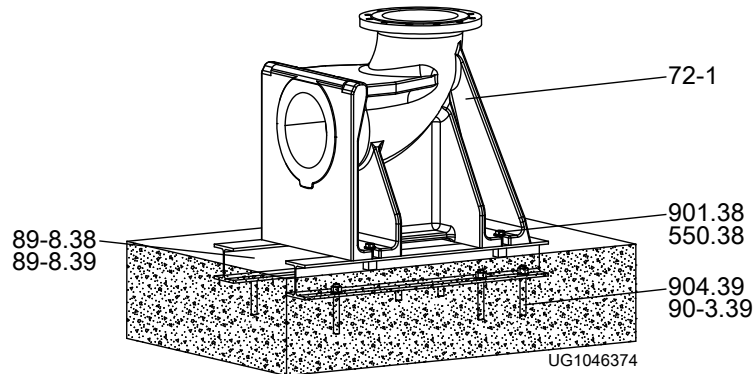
Fastening the base elbow with foundation rails and chemical anchors
